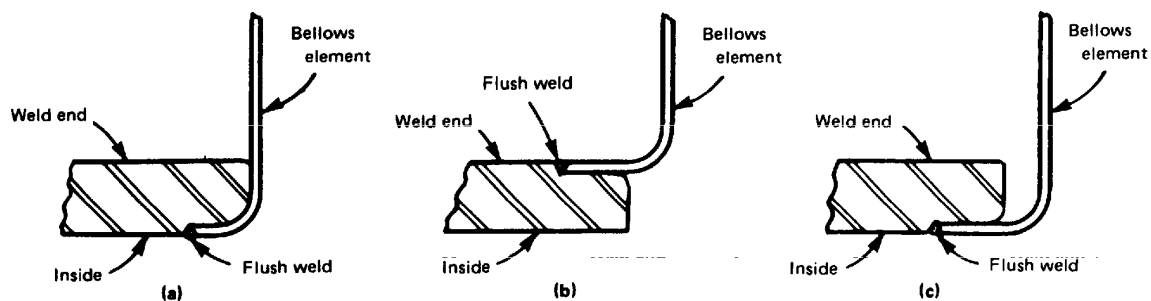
(c)-1 PERMISSIBLE ATTACHMENT WELDS FOR BELLOWS
